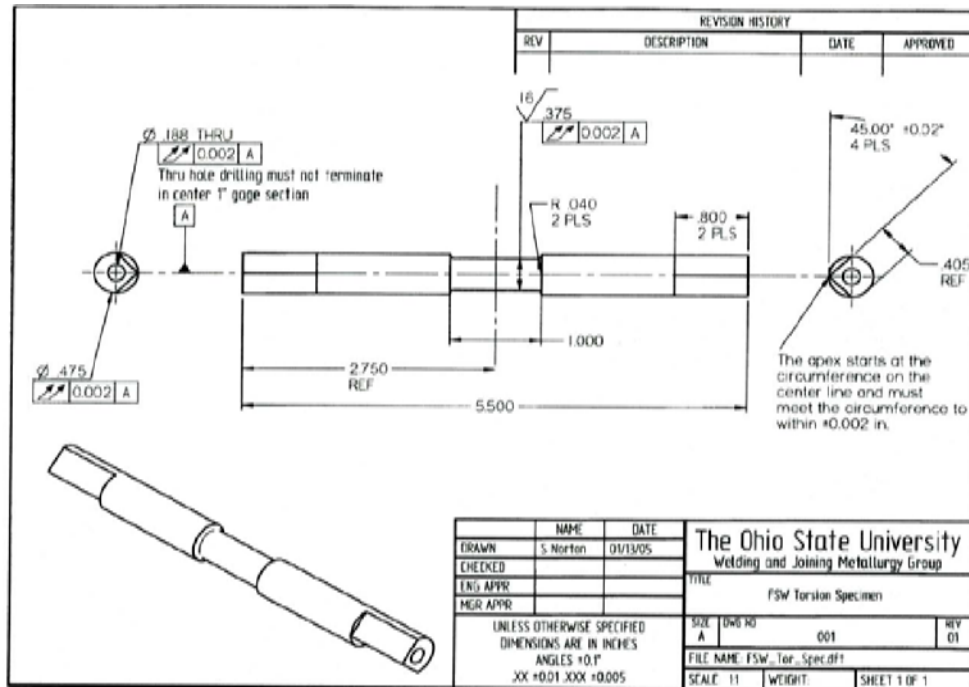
Modified Gleeble hot torsion test specimen [42]
